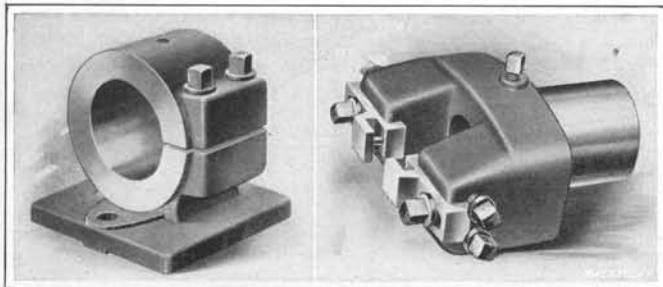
Standard Type of Tool-holder used on Turret Slide of Gridley Automatic Turret Lathe
